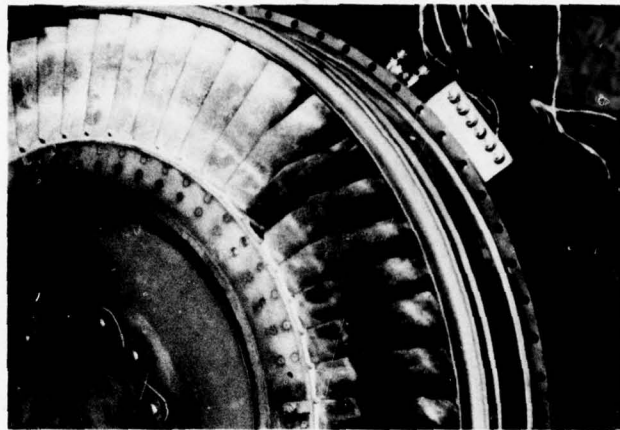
Implanted "Turbine Rotor Blade Damage"
